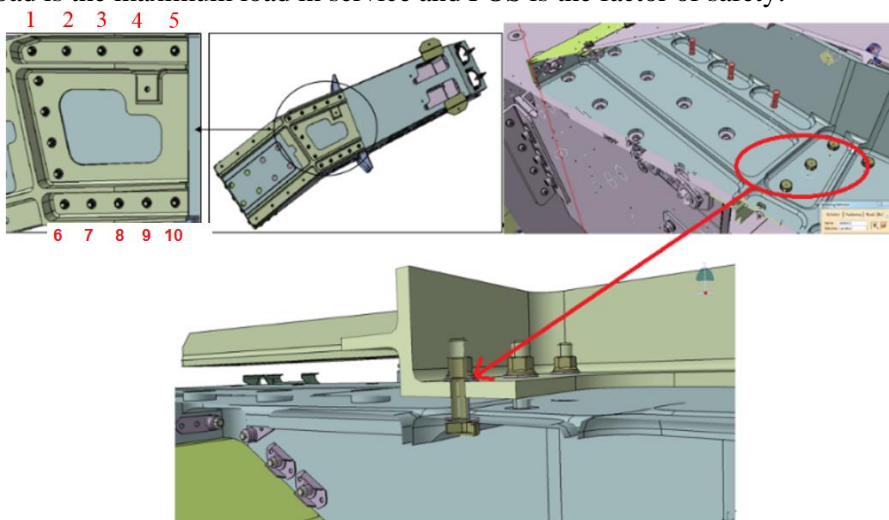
Hybrid bolted joint, detailed view and bolt numbering
